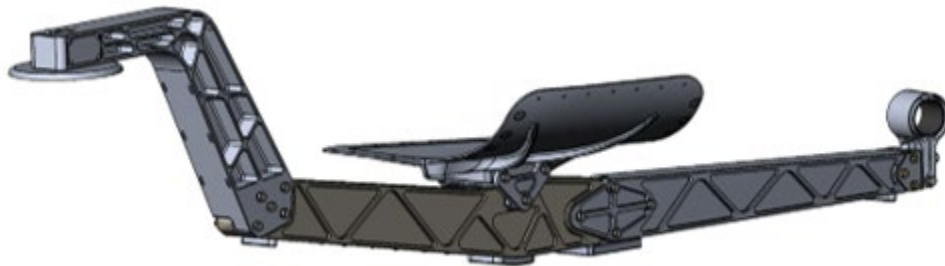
AFM-505-1 LH Utility Beam Mount Configuration Assembly.
